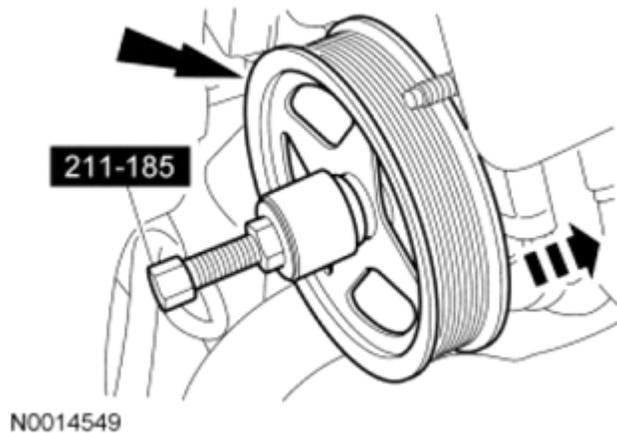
Installing Power Steering Pump Pulley Using Special Tool
